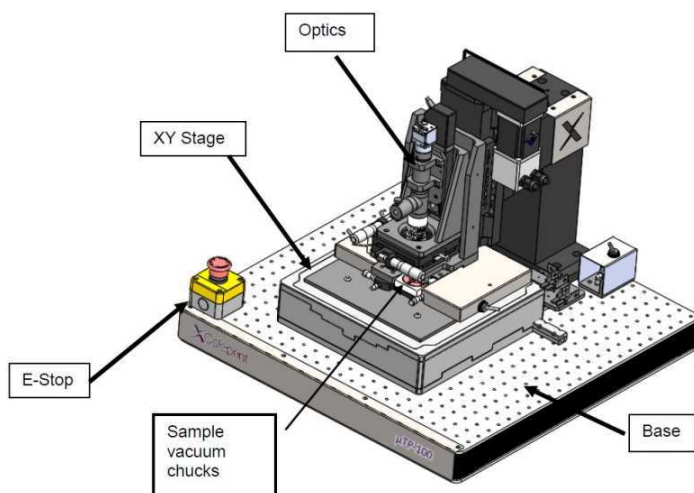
Schematics of the lab-scale transfer printing machine [132].
